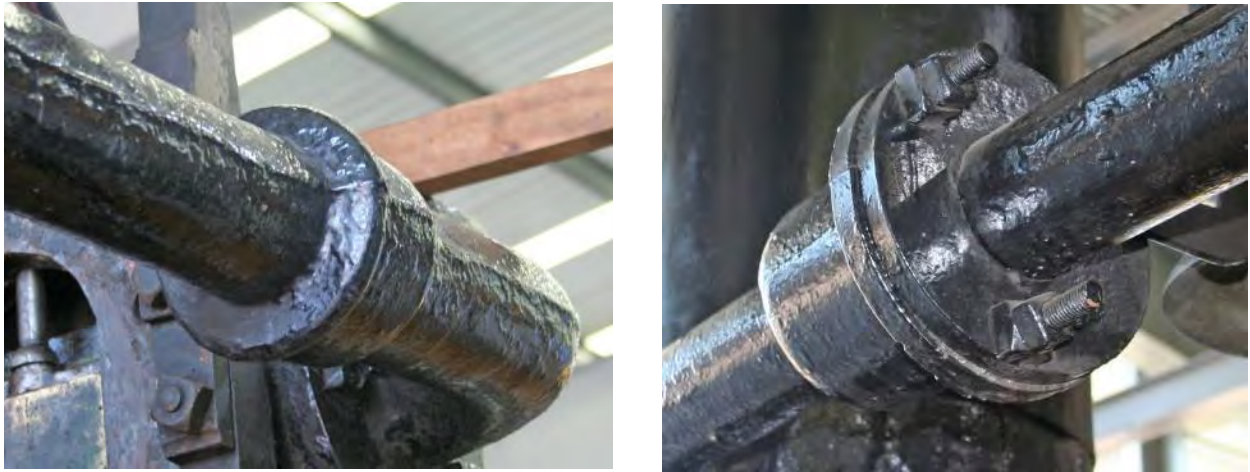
Left-side exhaust pipe sleeves: Rear sleeve (left) and front sleeve (right), showing the different forms of joints.
